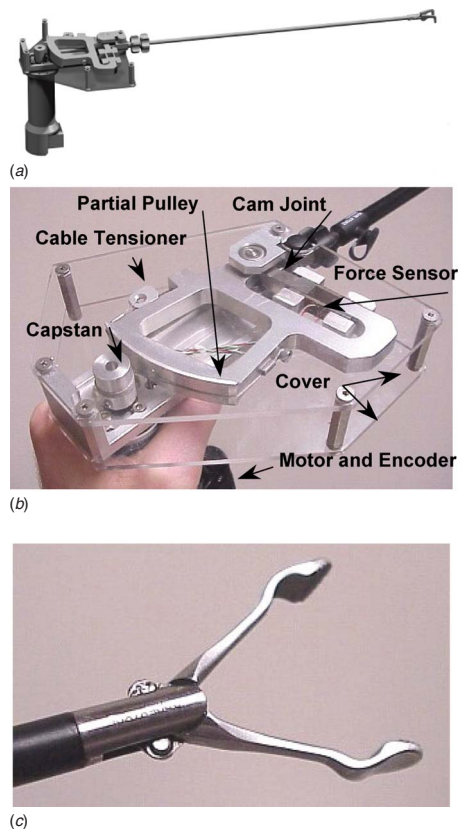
The MEG: (a) rendered CAD drawing of MEG (protective top cover not shown), (b) close-up photograph of the MEG's drive mechanism, and (c) close-up photograph of the MEG's Babcock grasper end effector
